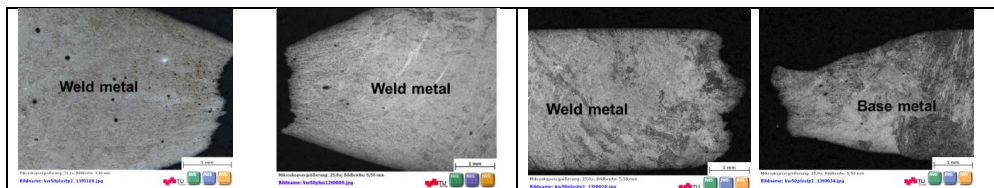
Fracture location of cross weld specimen 0.7 % Ni: 120 MPa (left), 100 MPa (right).
